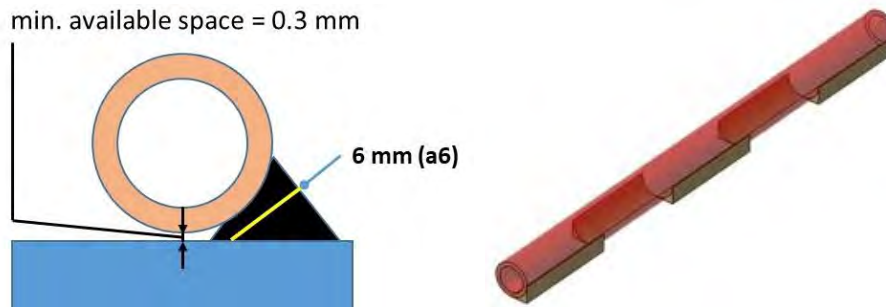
Left: Joint (weld / brazing) type and minimum joint height ( $a_6$ ). If the shape and spacing of the alternated welds avoid any trapped volume under the loops, min. required available space of 0.3 mm could be neglected Right: Alternating placement of the joints (welding / brazing seams).
